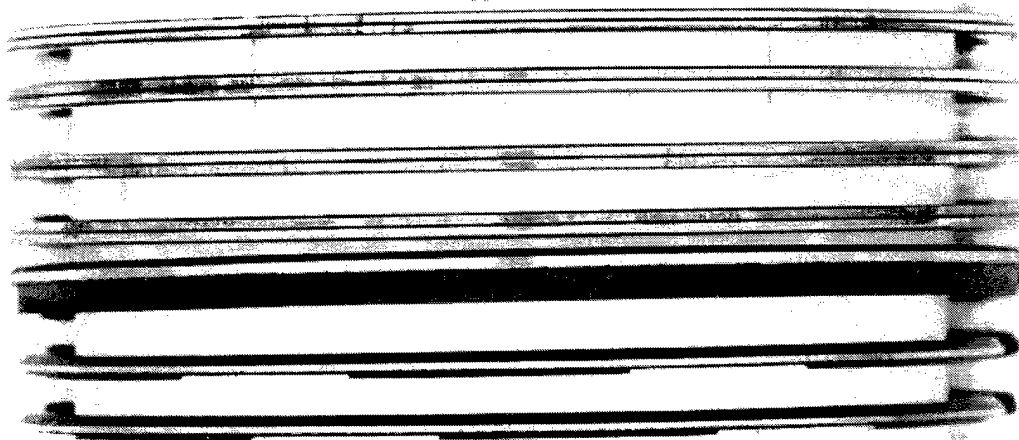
6V53T Test 39, Cylinder 2-L, Rings
